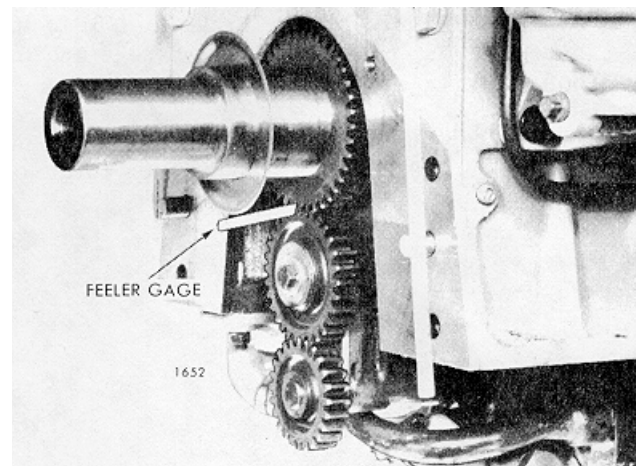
Measuring the Clearance Between the Teeth of the Oil Pump Driven Gears
